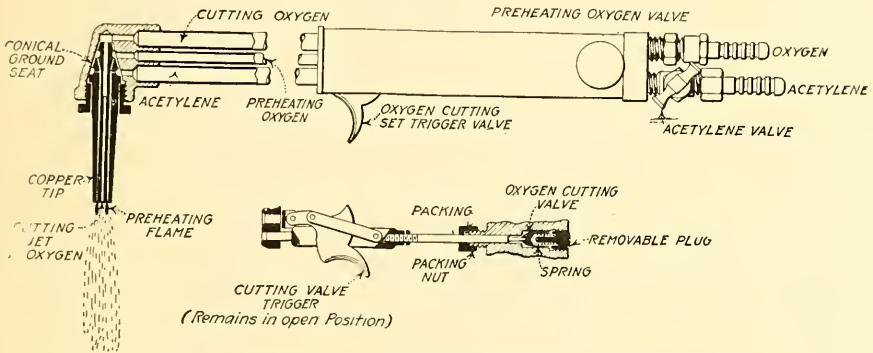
Details of the Davis-Bournonville Cutting Torch.
